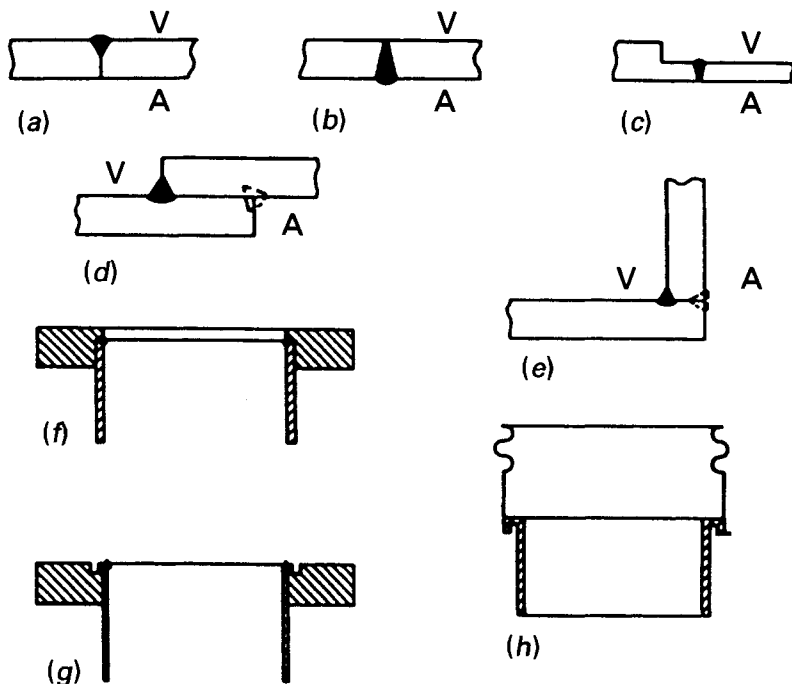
Examples of welded joints: (a) Butt-welded from the vacuum side; (b) through-welded from the atmospheric side; (c) joining parts of unequal thickness; (d) lap weld illustrating proper tack welds on the atmospheric side; (e) corner weld; (f) thick-wall tubing-to-flange weld. The flange is machined so that the bead depth is approximately equal to the wall thickness. (g) Thin-wall tubing-to-flange weld joint showing relief groove; (h) bellows-to-pipe adapter. The right side is shown before welding. The raised lip (0.025 cm high \times 0.035 cm thick) provided filler metal for the weld; a copper heat sink was attached to the bellows end section during welding.
